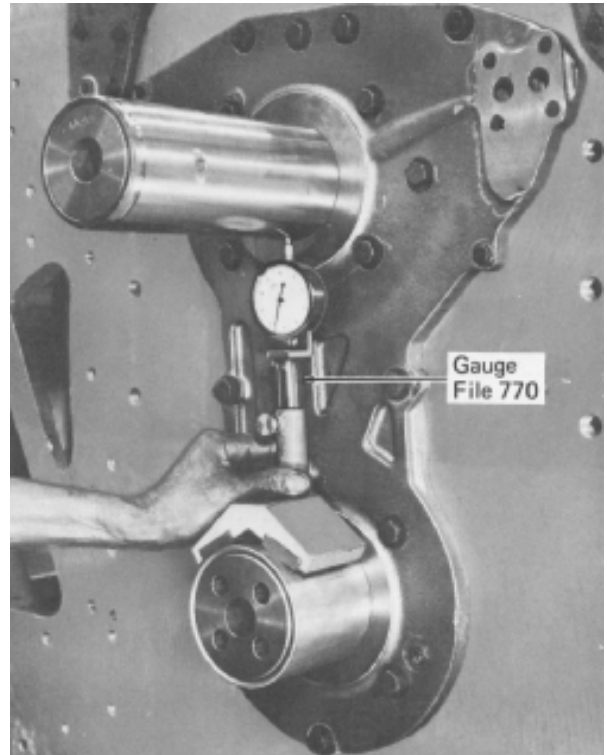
Checking Parallelism Of No. 1 And No. 2 Stubshafts
